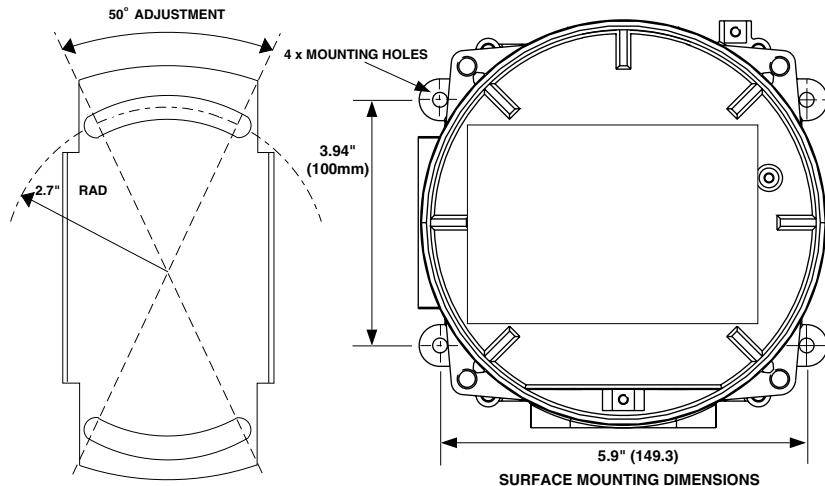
Adjustable Mounting Bracket and Surface Mounting Dimensions
